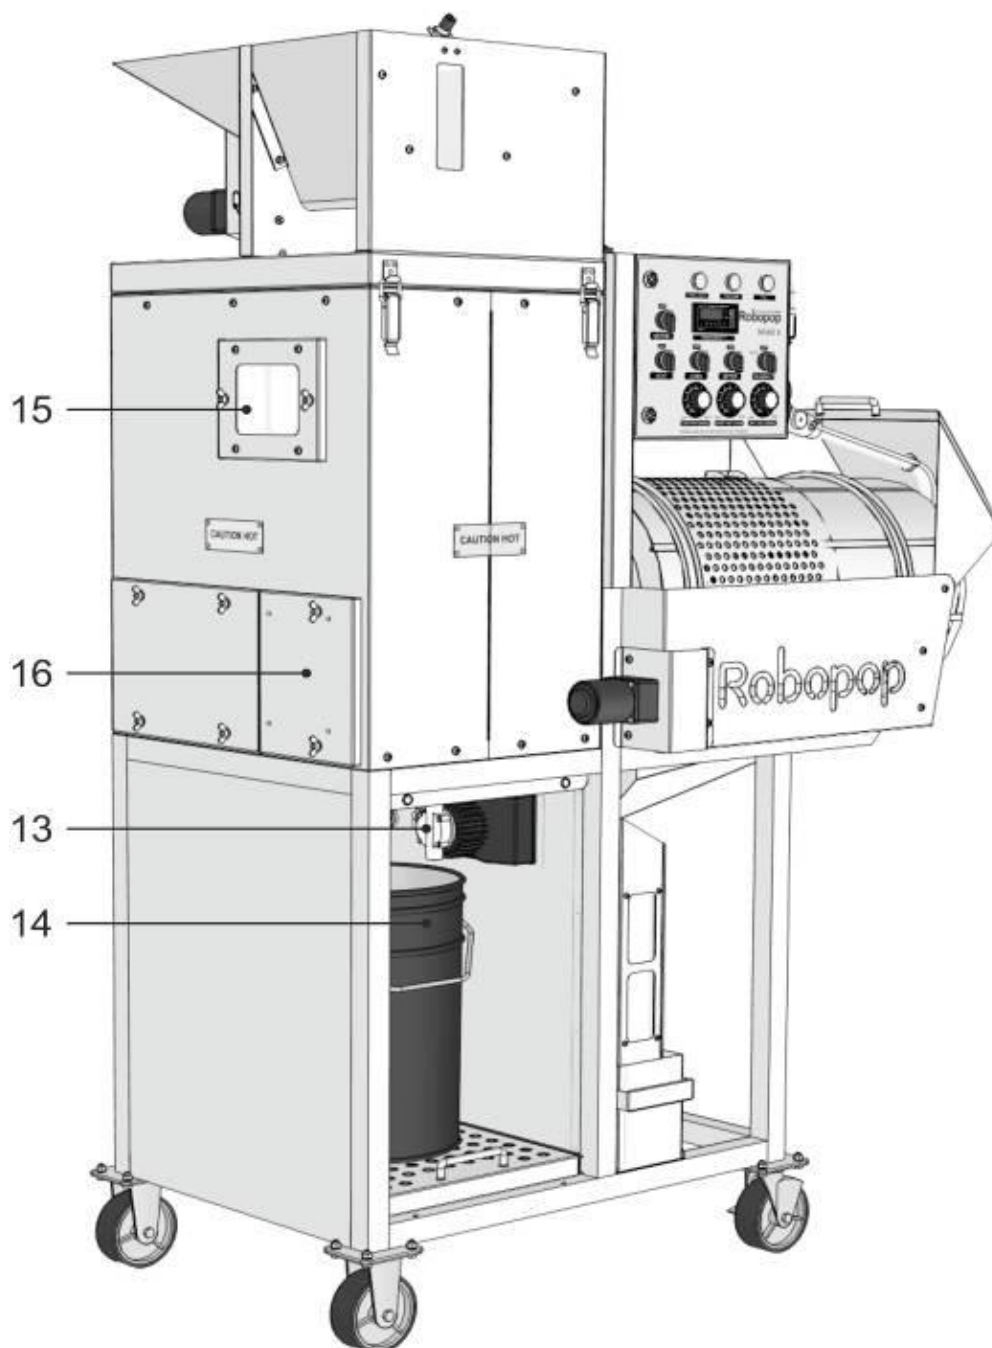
Arrangement of Robopop popcorn machine (left-side view)
